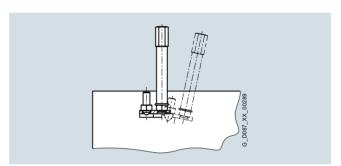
/44 Example of manual brake release lever with locking mechanism for brake FDX
